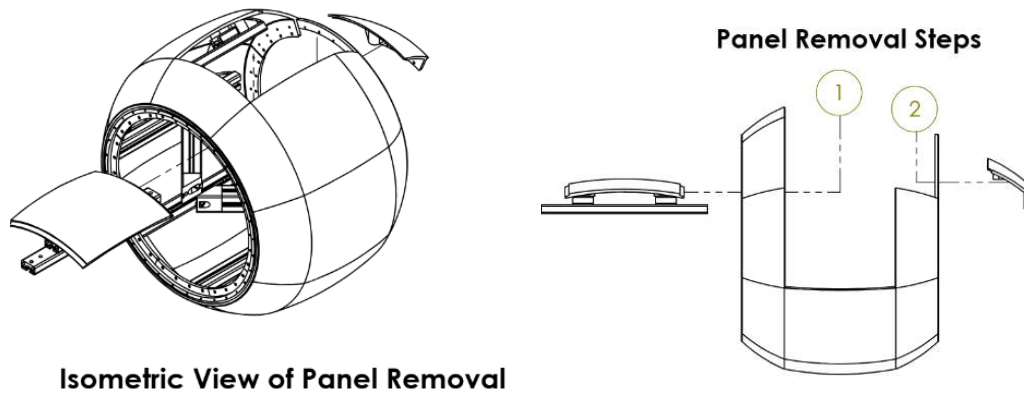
Isometric sketch of the core mold assembly and disassembly process (steps 1 and 2)
